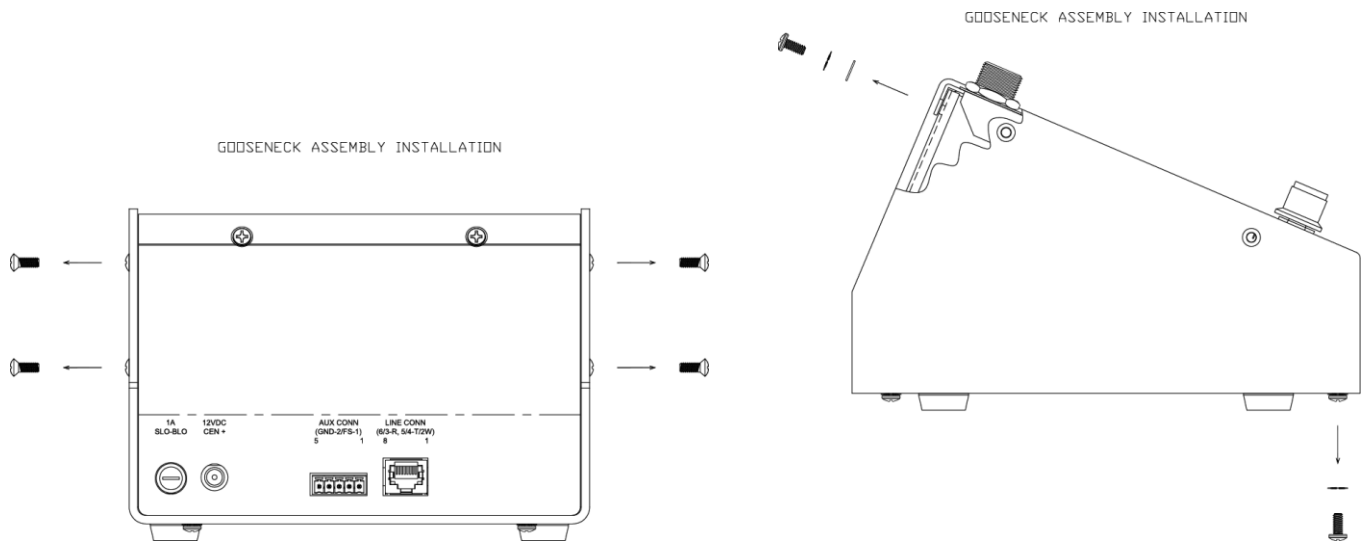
GOOSENECK ASSEMBLY INSTALLATION, SIDES, BOTTOM & BACK SCREWS REMOVAL
